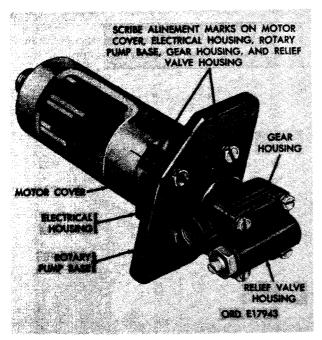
LOCATION OF ALINEMENT MARKS ON FLAME HEATER FUEL PUMP ASSEMBLY.
